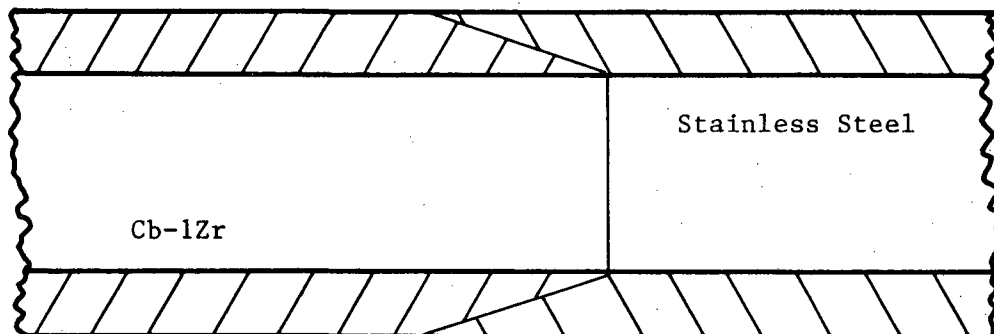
Sketch of a Longitudinal Full Section View of a Coextruded Joint.
